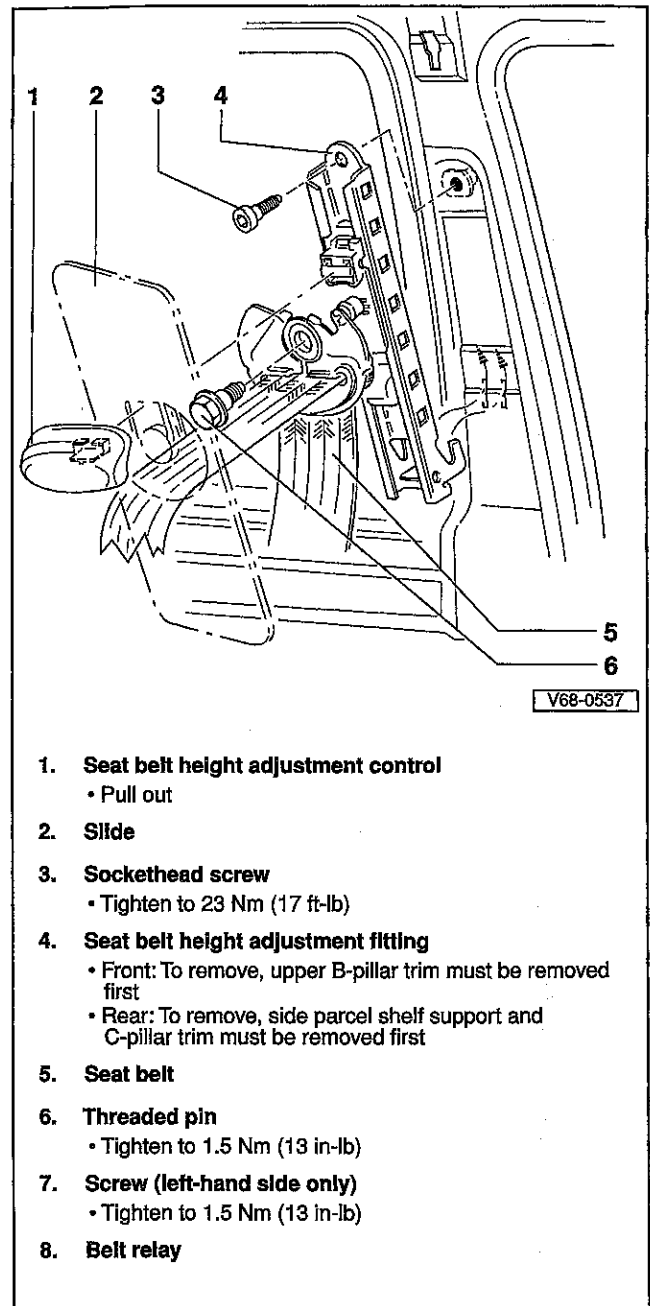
Exploded view of seat belt height adjustment fittings for cars with airbag.
